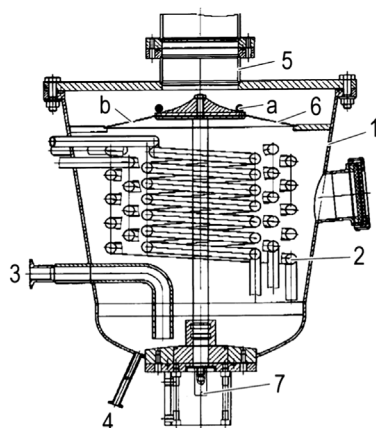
Scheme of the condenser design in plant PI 2 in Table 1.27. 1, condenser wall; 2, condenser coils; 3, suction tube of vacuum pump; 4, water drain; 5, connection to drying chamber; 6, valve with seal (a) in open position and temperature shield (b); 7, hydraulic for valve operation.
